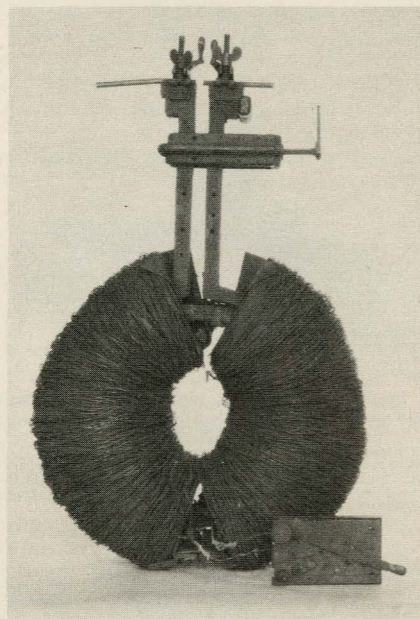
Welding transformer of early type with single-turn secondary, built in 1886
